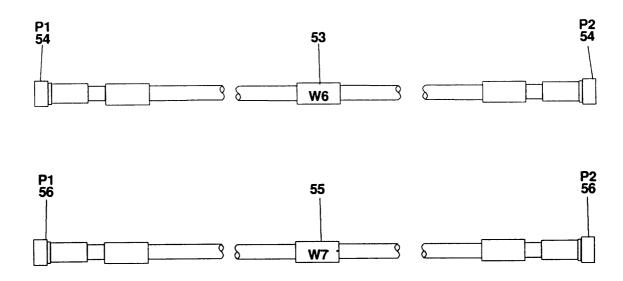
UH1H Systems Installation Cable Group (Sheet 4 of 4)
